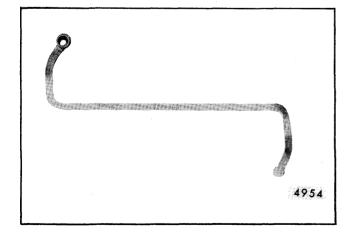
Front Door Hinge Tool J-24353 or Equivalent
